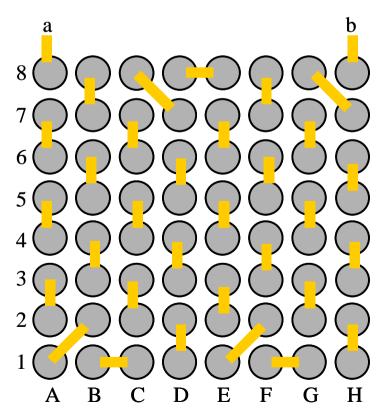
Fortified BGA 64-Ball Board Layout (Top View)
